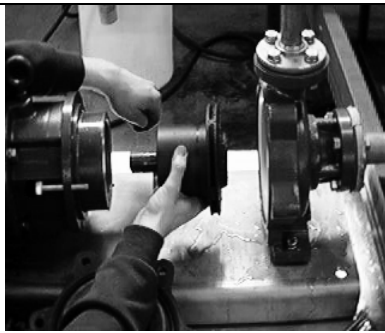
Remove Impeller from Pump Casing OR ...
